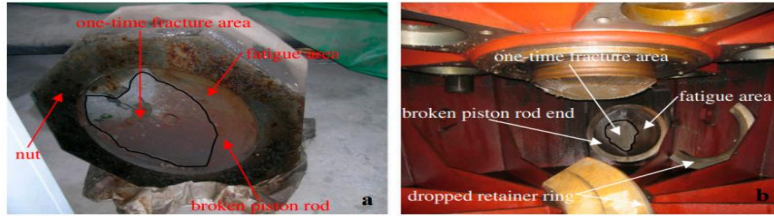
Fractured piston rod a. nut structure b. retainer ring structure [8].
